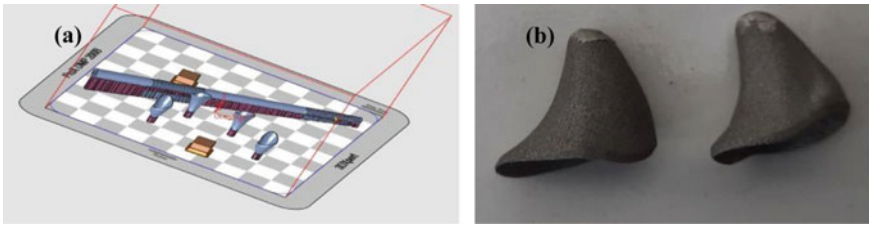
a CAD files of DC in 3DXpert software, b Final printed DC after removed from the built plate
